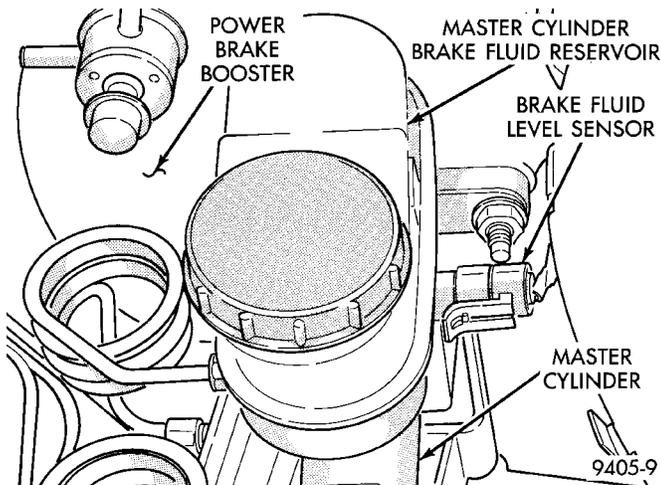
Master Cylinder Brake Fluid Level Sensor
